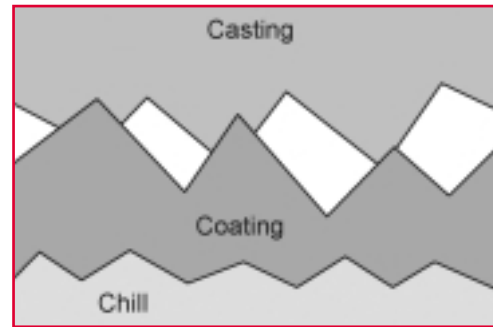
Sketch of the surfaces of a casting and a coated die in contact under pressure
